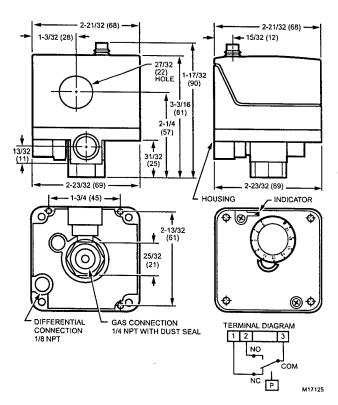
C6097 1/4 in. NPT Mount dimensions in in. (mm).
